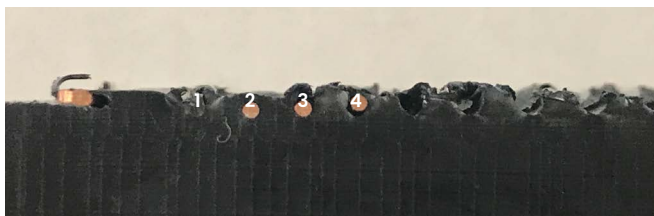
Close-up of EF coupler socket mouth showing brittle fracture at the fusion interface from heating wire locations 2 through to 4.
